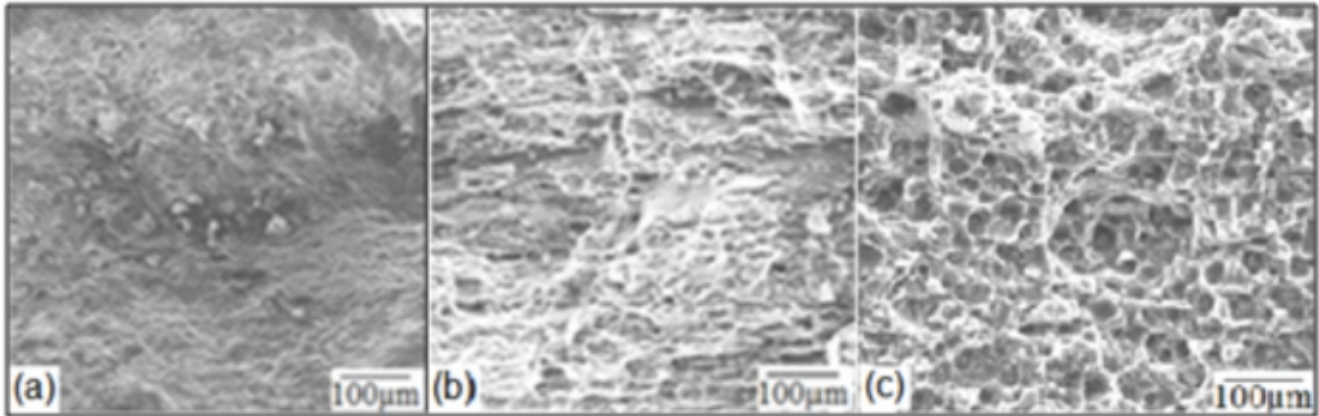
SEM Fractographs of fractured SCC samples of welds without B₄C nano powder addition: (a) As-welded, (b) PWHT-T6 and (c) PWHT-RRA
